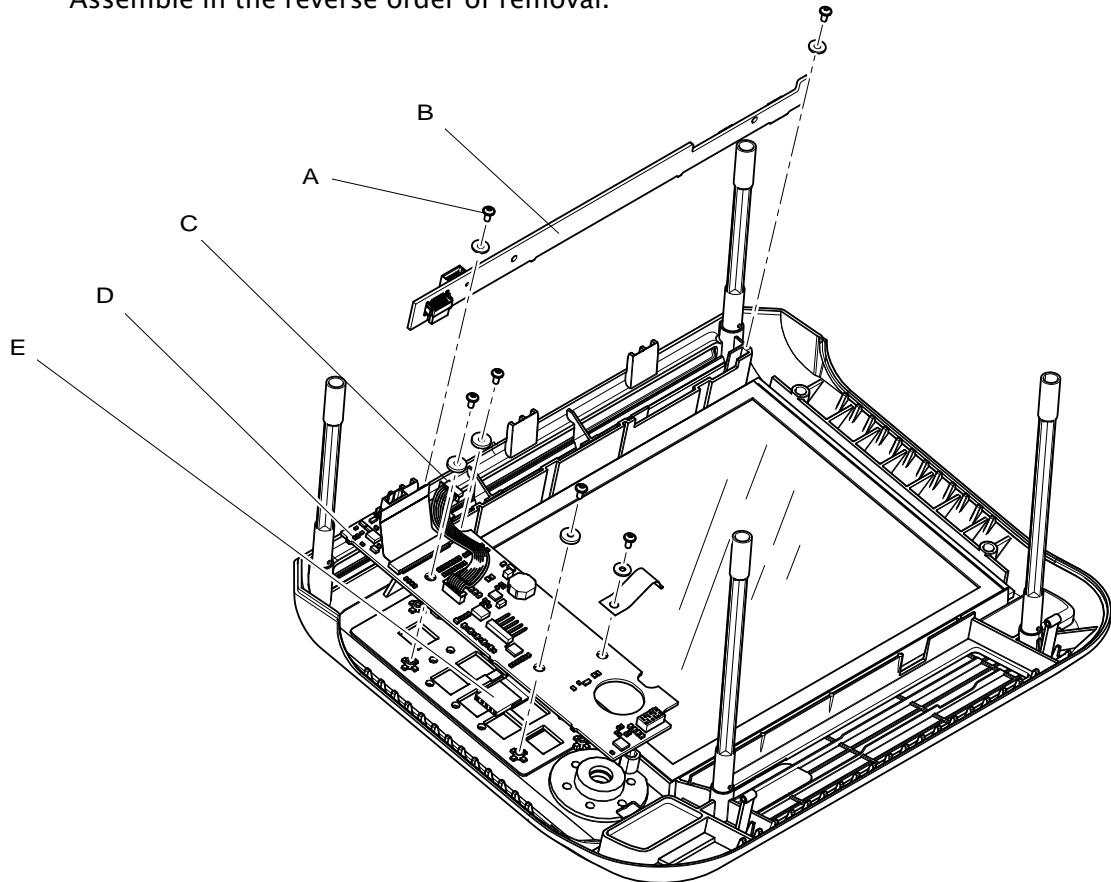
Front Panel Print and Alarm Lamp Removal/Assembly
